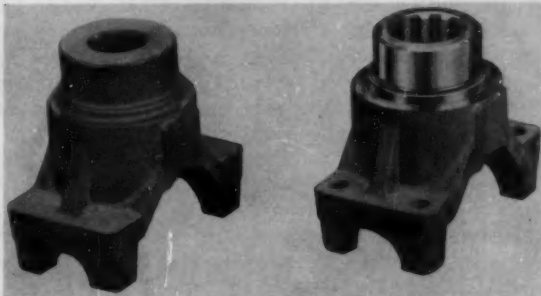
Shell-molded ArmaSteel flange yoke used on an automotive propeller shaft. This casting eliminates machining on the outside and inside surfaces of the body portion.
